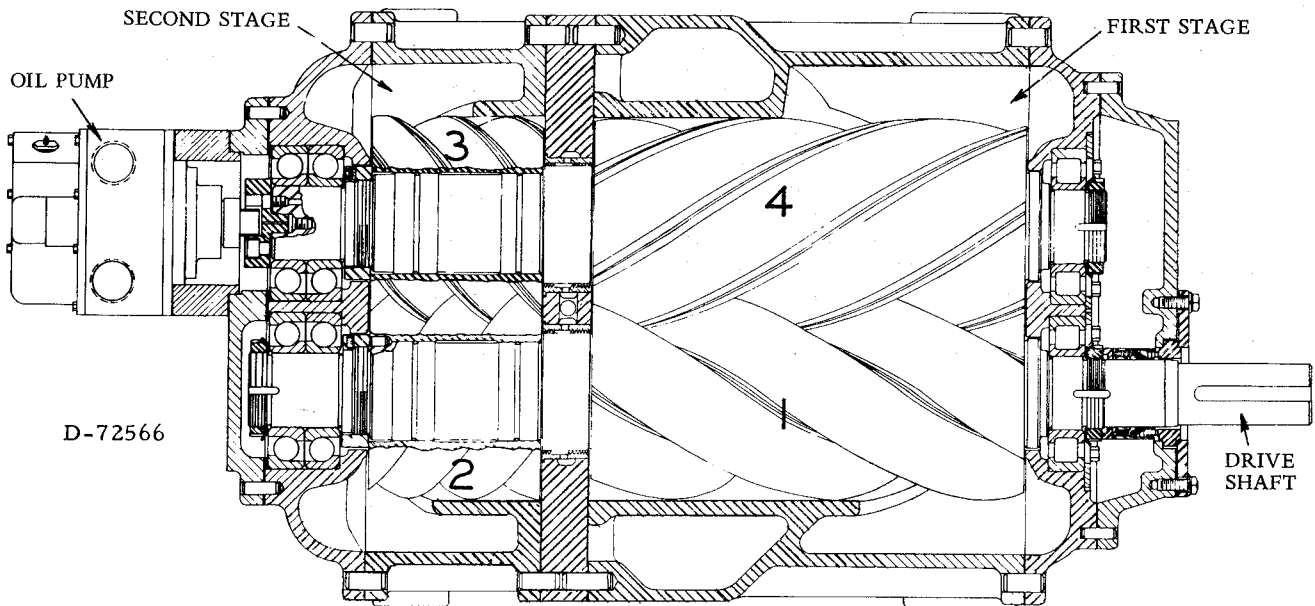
SECTIONAL VIEW OF COMPRESSOR
